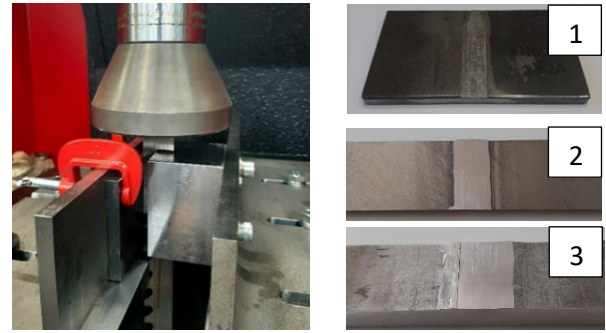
The innovative method of post weld bead surface broaching: 1) non-alloy structural steel S235JR (1015); 2) stainless steel 1.3964; 3) aluminum alloy PA47 (7020)
